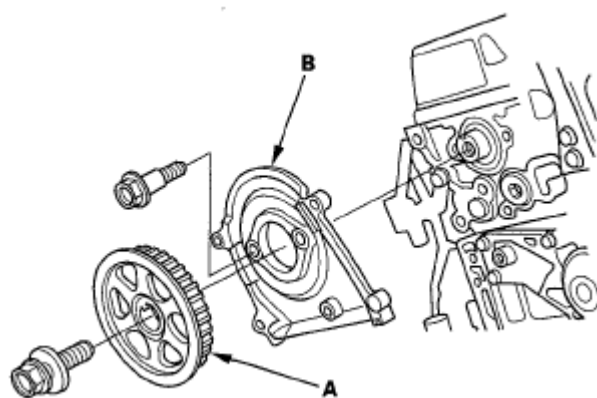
Identifying Front And Rear Camshaft Pulleys And Front And Rear Back Covers
